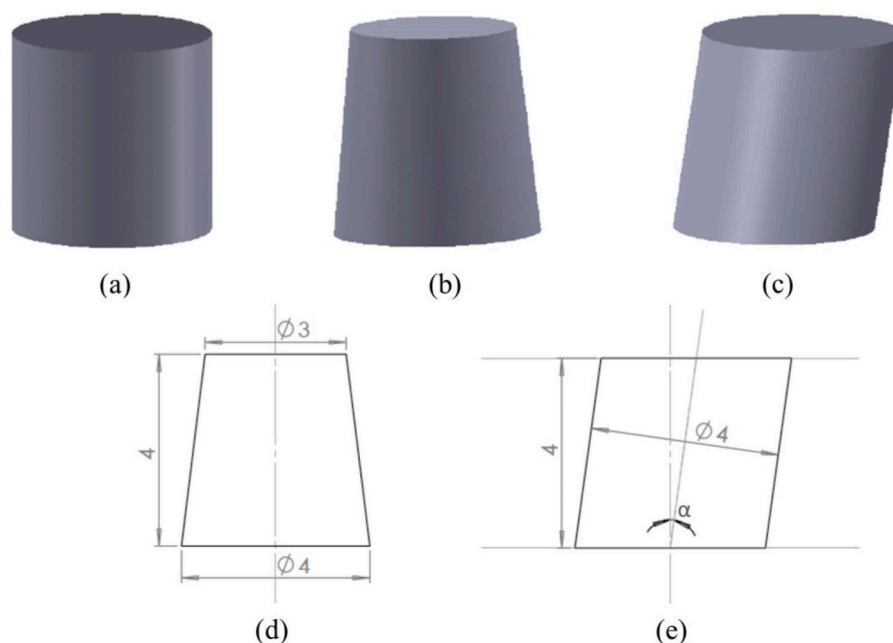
Three dimensional models of (a) cylindrical specimen, (b) cone specimen (c) inclined cylindrical specimen. The dimensions of the cone specimen and the inclined cylindrical specimen are provided in (d) and (e). (unit: mm).
